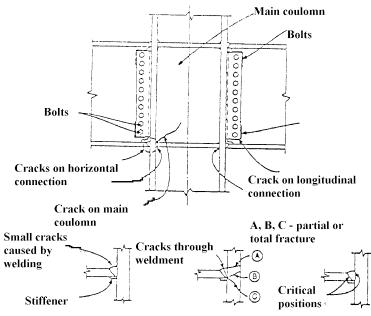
Cracks in critical regions of welded components of rotor excavator
